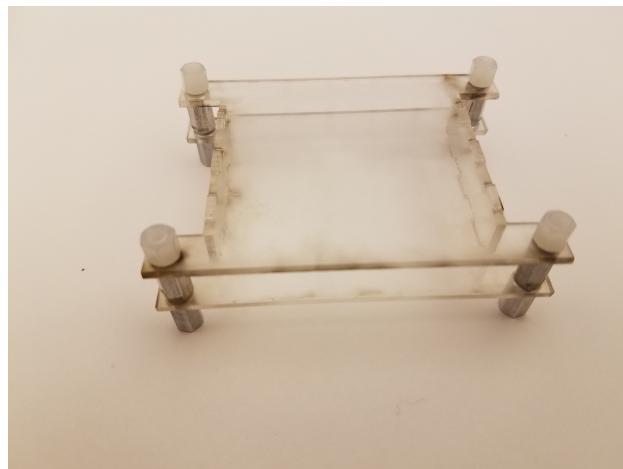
The finished battery bracket assembly with hexagonal stand off supports attached.
